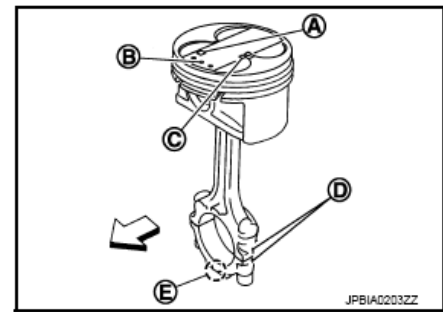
Identifying Grade Number, Front Mark On Piston And Connecting Rod
